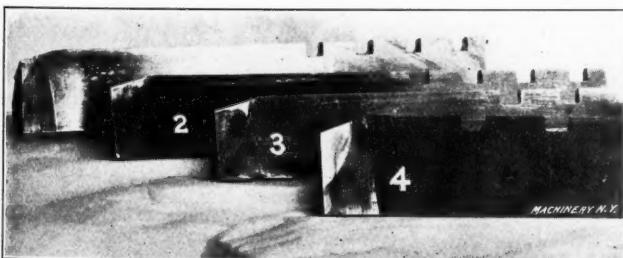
Reverse Side of Cutters shown in Fig. 1. Illustration shows Rubbing Contact of the Tool against the Shoulder of the work. Each Tool bears Same Number in Both Engravings.
